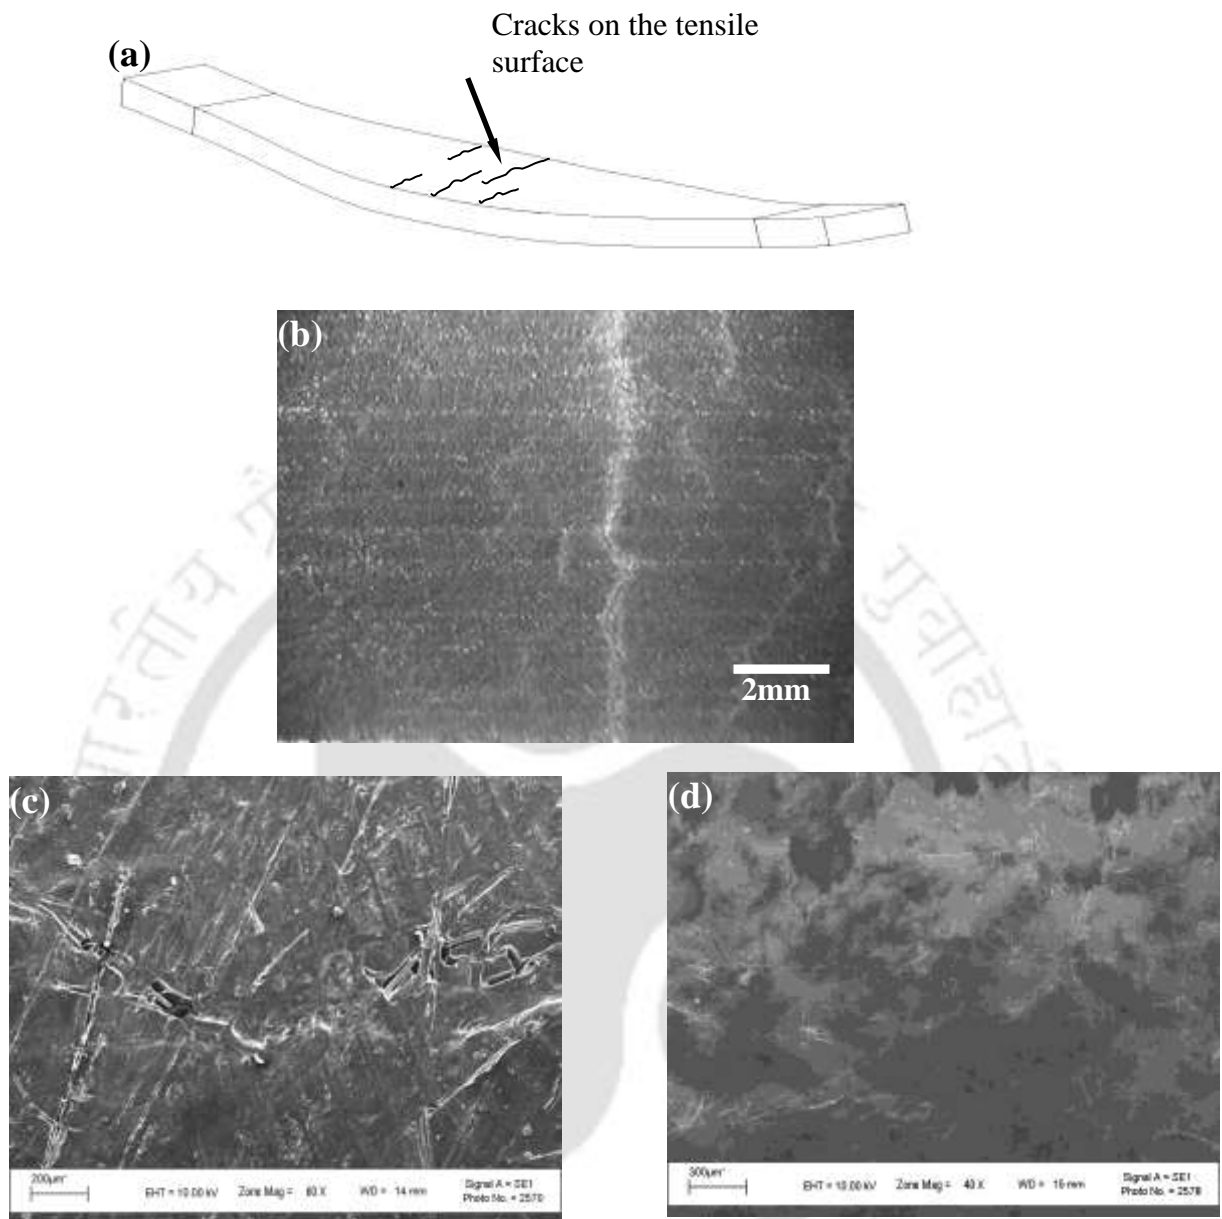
Failure morphology of long fiber reinforced leaf spring (a) schematic cracks on the tensile surface (b) cracks in the direction transverse to the leaf spring length (c) cracks on the leaf spring (d) crazing on the leaf spring.
